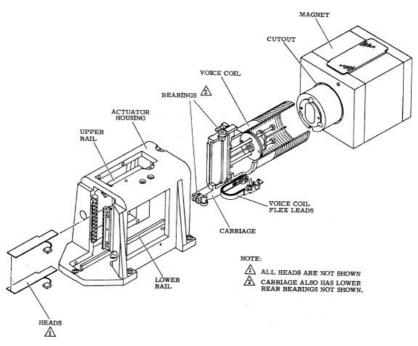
The coil and head assembly for a similar model of drive (from pg. 49 of [5])
